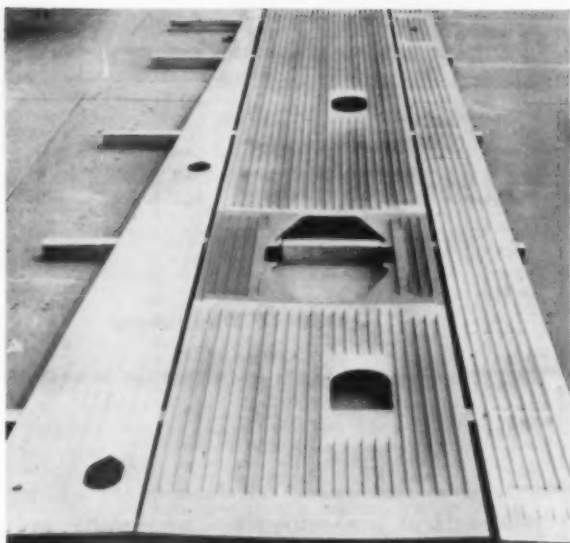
This lower inner wing panel for a Super Constellation weighs 3300 lb in the original plate and about 390 lb when finished.
